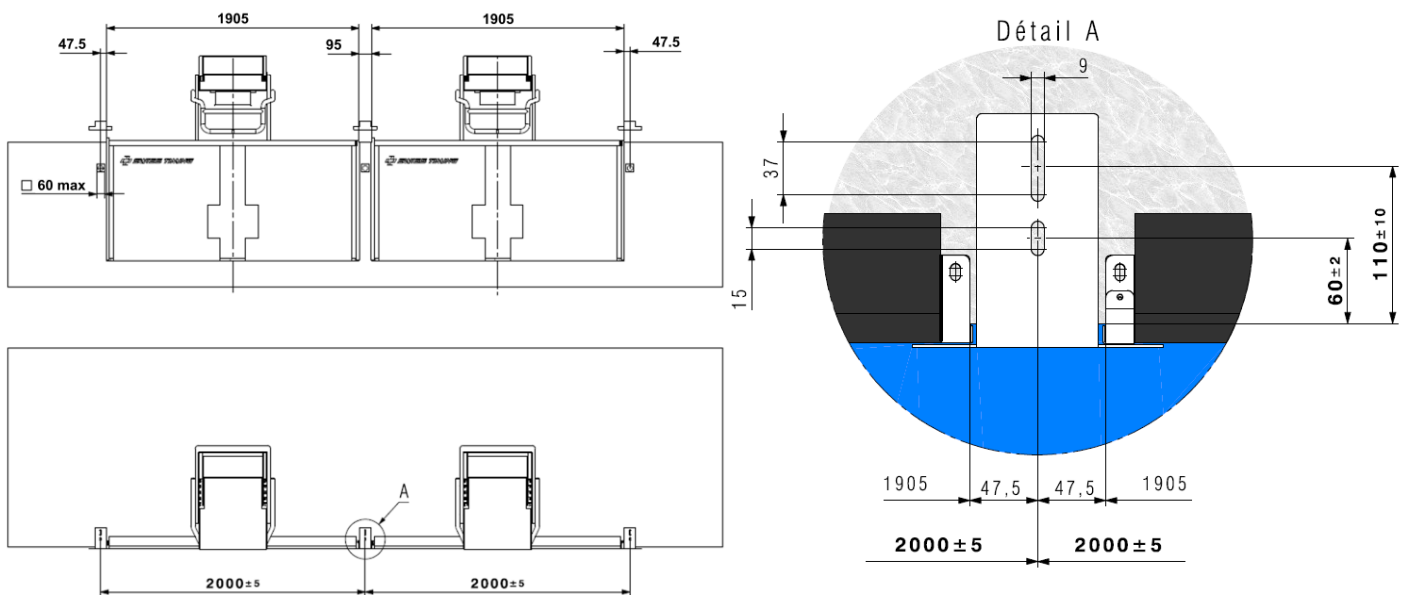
Touchpad 190x90 / Angle bracket mounting
